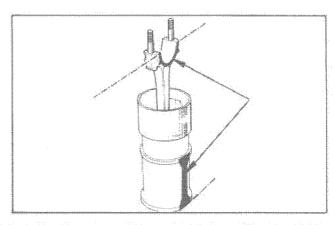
Con-rod must be parallel to liner flat when fitting
